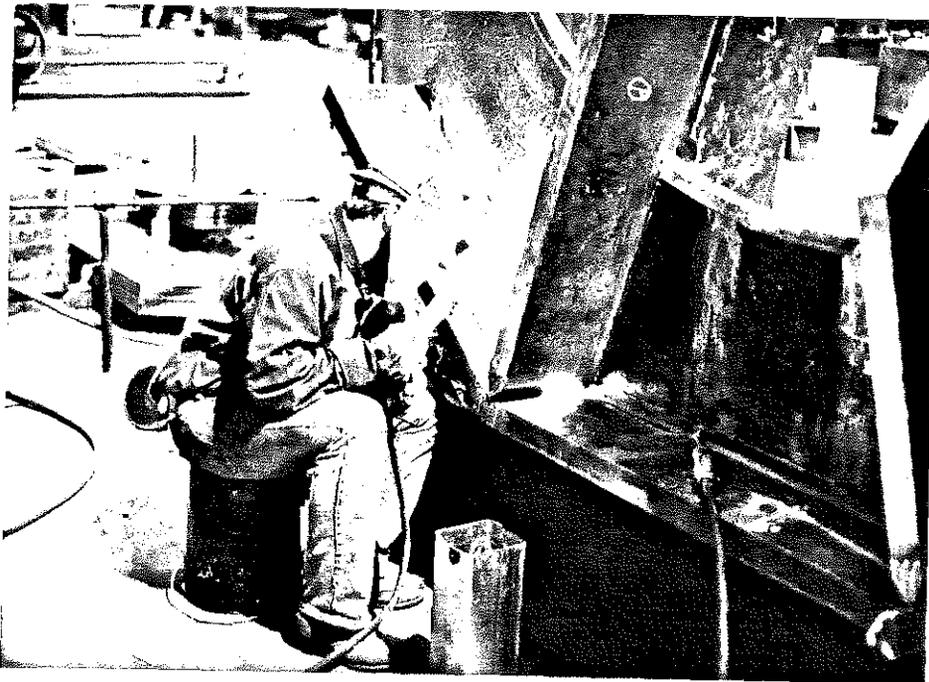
Depositing Full-Penetration Stiffener-to-Flange Welds Using Manual SMAW.
